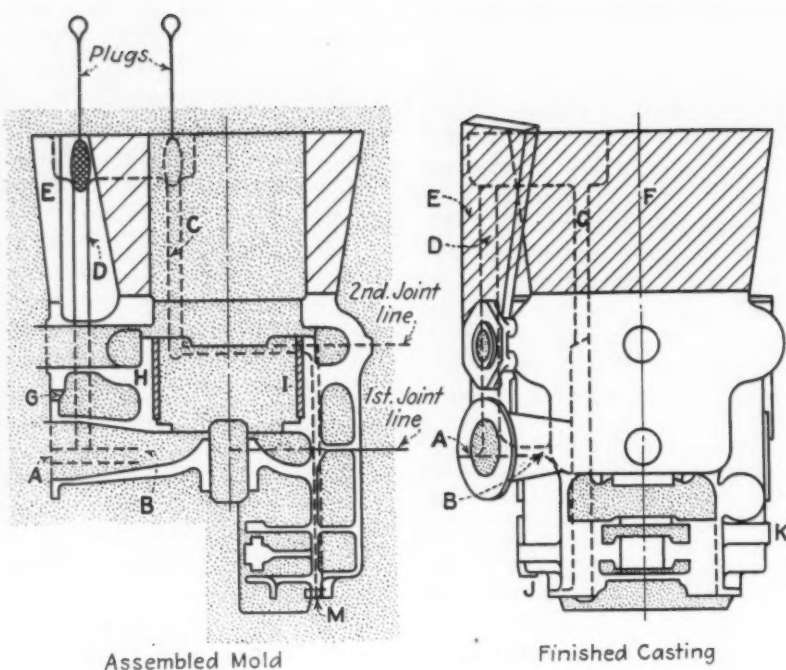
The greater shrink rate of high tensile bronze imposed an added problem in selecting the proper method of gating and feeding this turbine pump casting.
